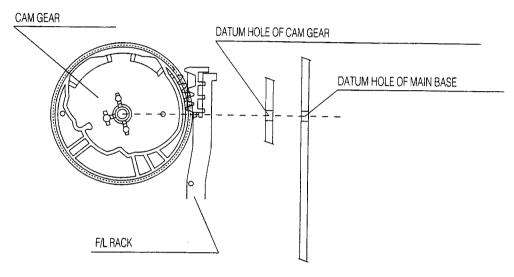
DATUM POSITION OF F/L RACK & CAM GEAR
